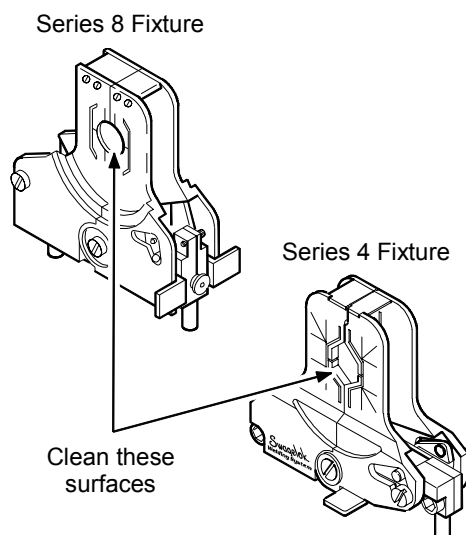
Cleaning the Micro Weld Head Fixtures
